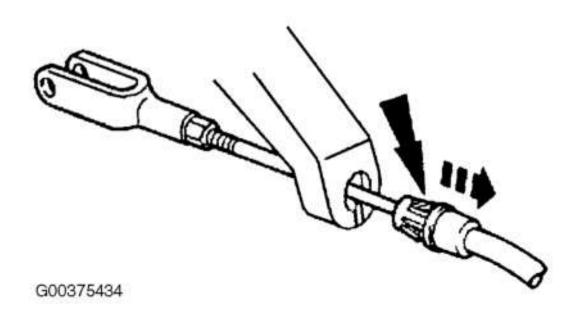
Removing Parking Brake Cable Courtesy of FORD MOTOR CO.
